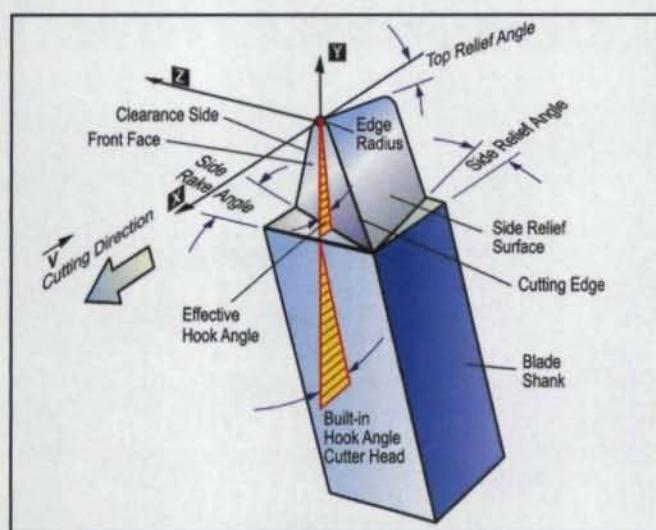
Process-relevant angles on a bevel gear cutting blade.
